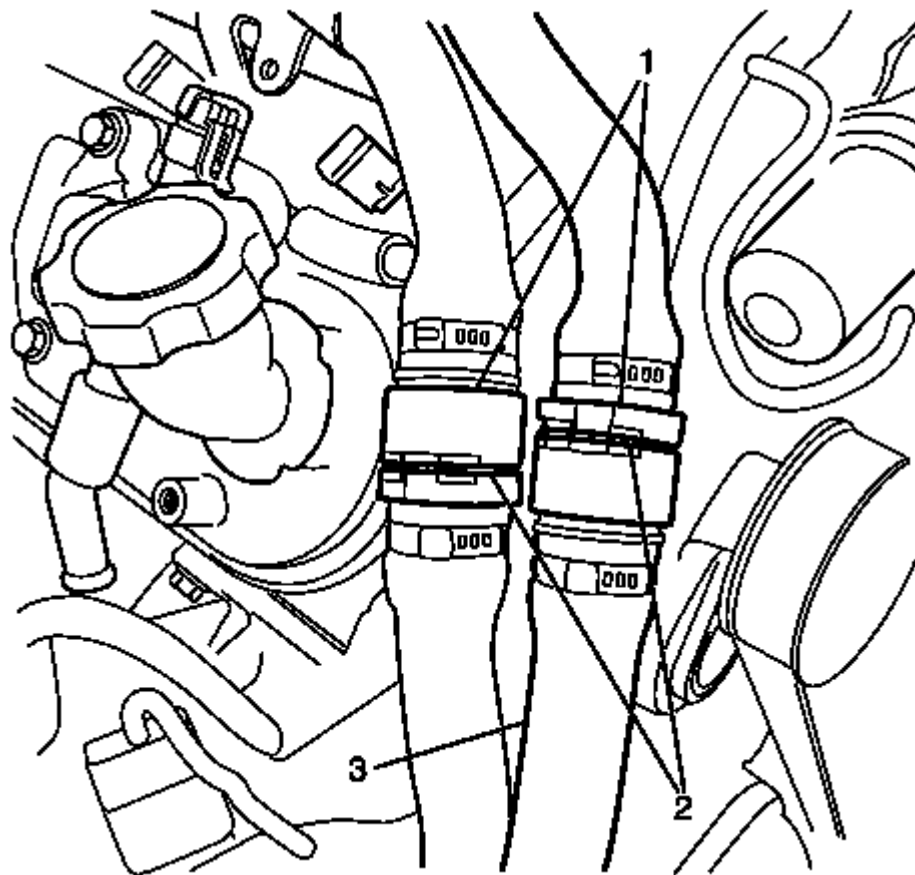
Identifying Heater Hose Assembly Quick Connect Fittings & Retaining Clips
